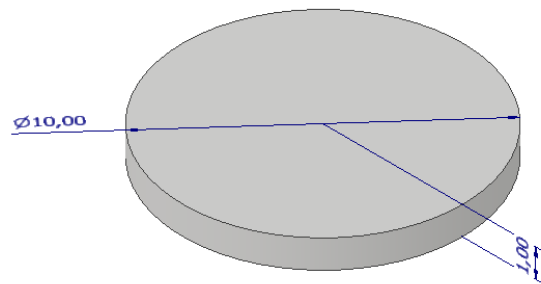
Sample CAD model (Autodesk Inventor) with technical data. Thickness can be 1.00 mm or 0.80 mm
